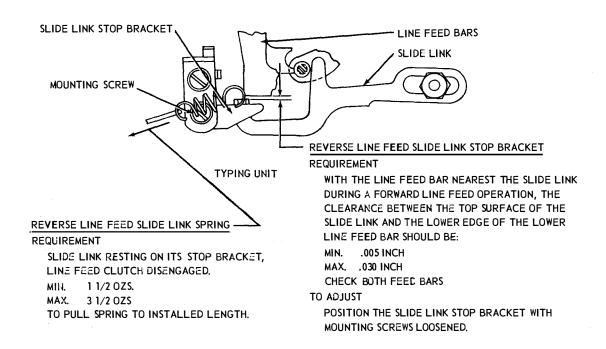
LOCAL REVERSE LINE FEED MECHANISM, LEFT VIEW
